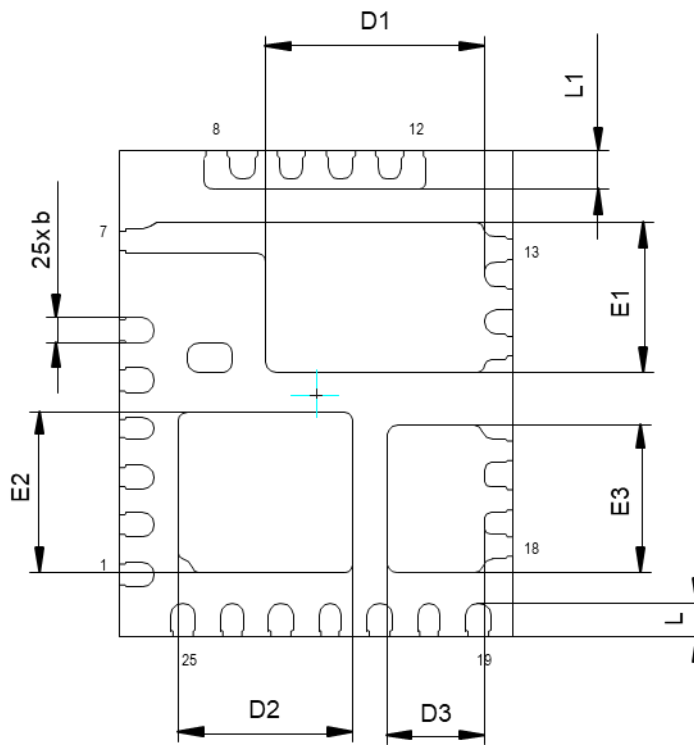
Mechanical Dimensions of Package (Top View and Side View) in mm
